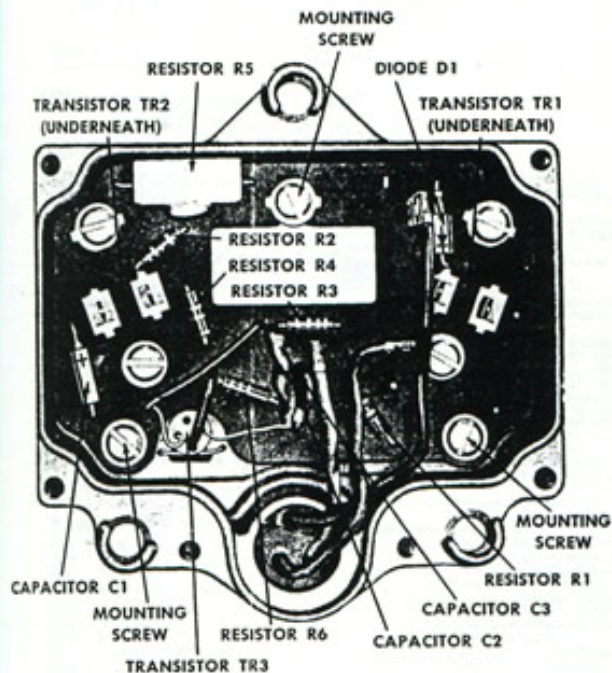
Typical amplifier with bottom plate removed. (Parts keyed to Figures 5 and 6)
